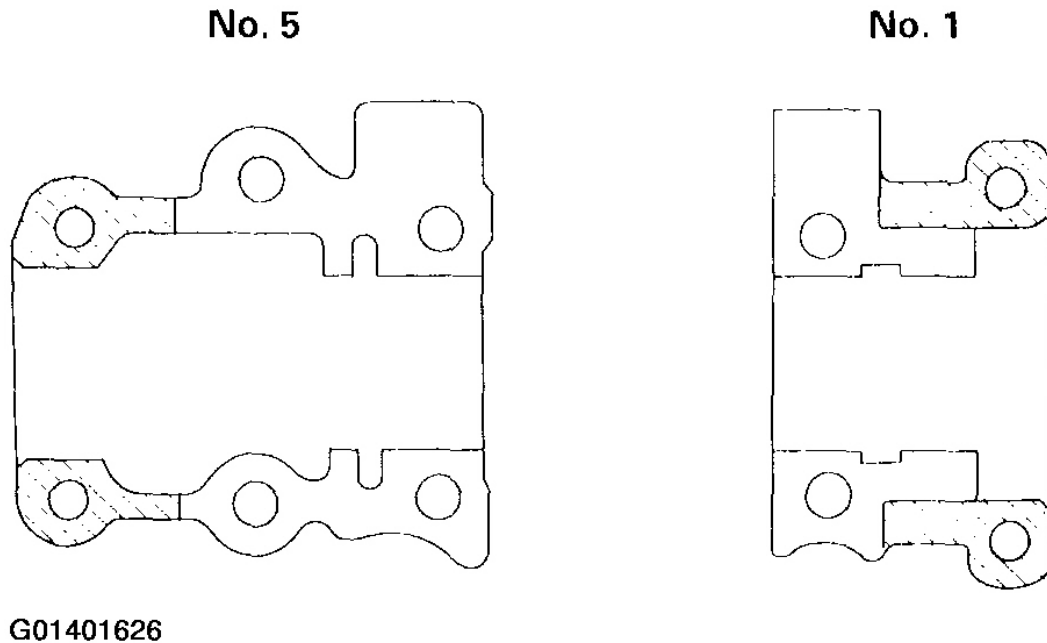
Applying Liquid Gasket To Head Mating Surface of No. 1 & No. 5 Camshaft Holders
